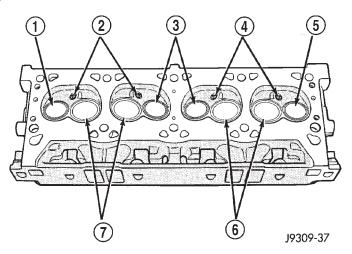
Cylinder Head Assembly—V-8 Gas Engines
